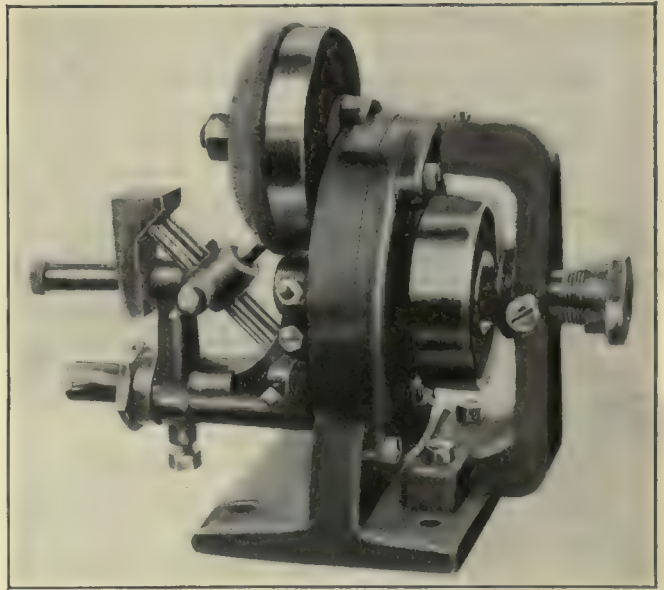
THE METHOD OF DRESSING THE WHEEL
